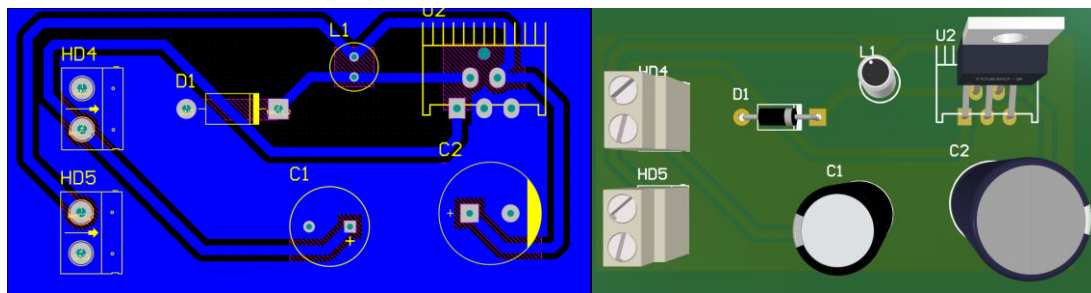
PCB DC-DC buck converter 12VDC to 5VDC circuit
